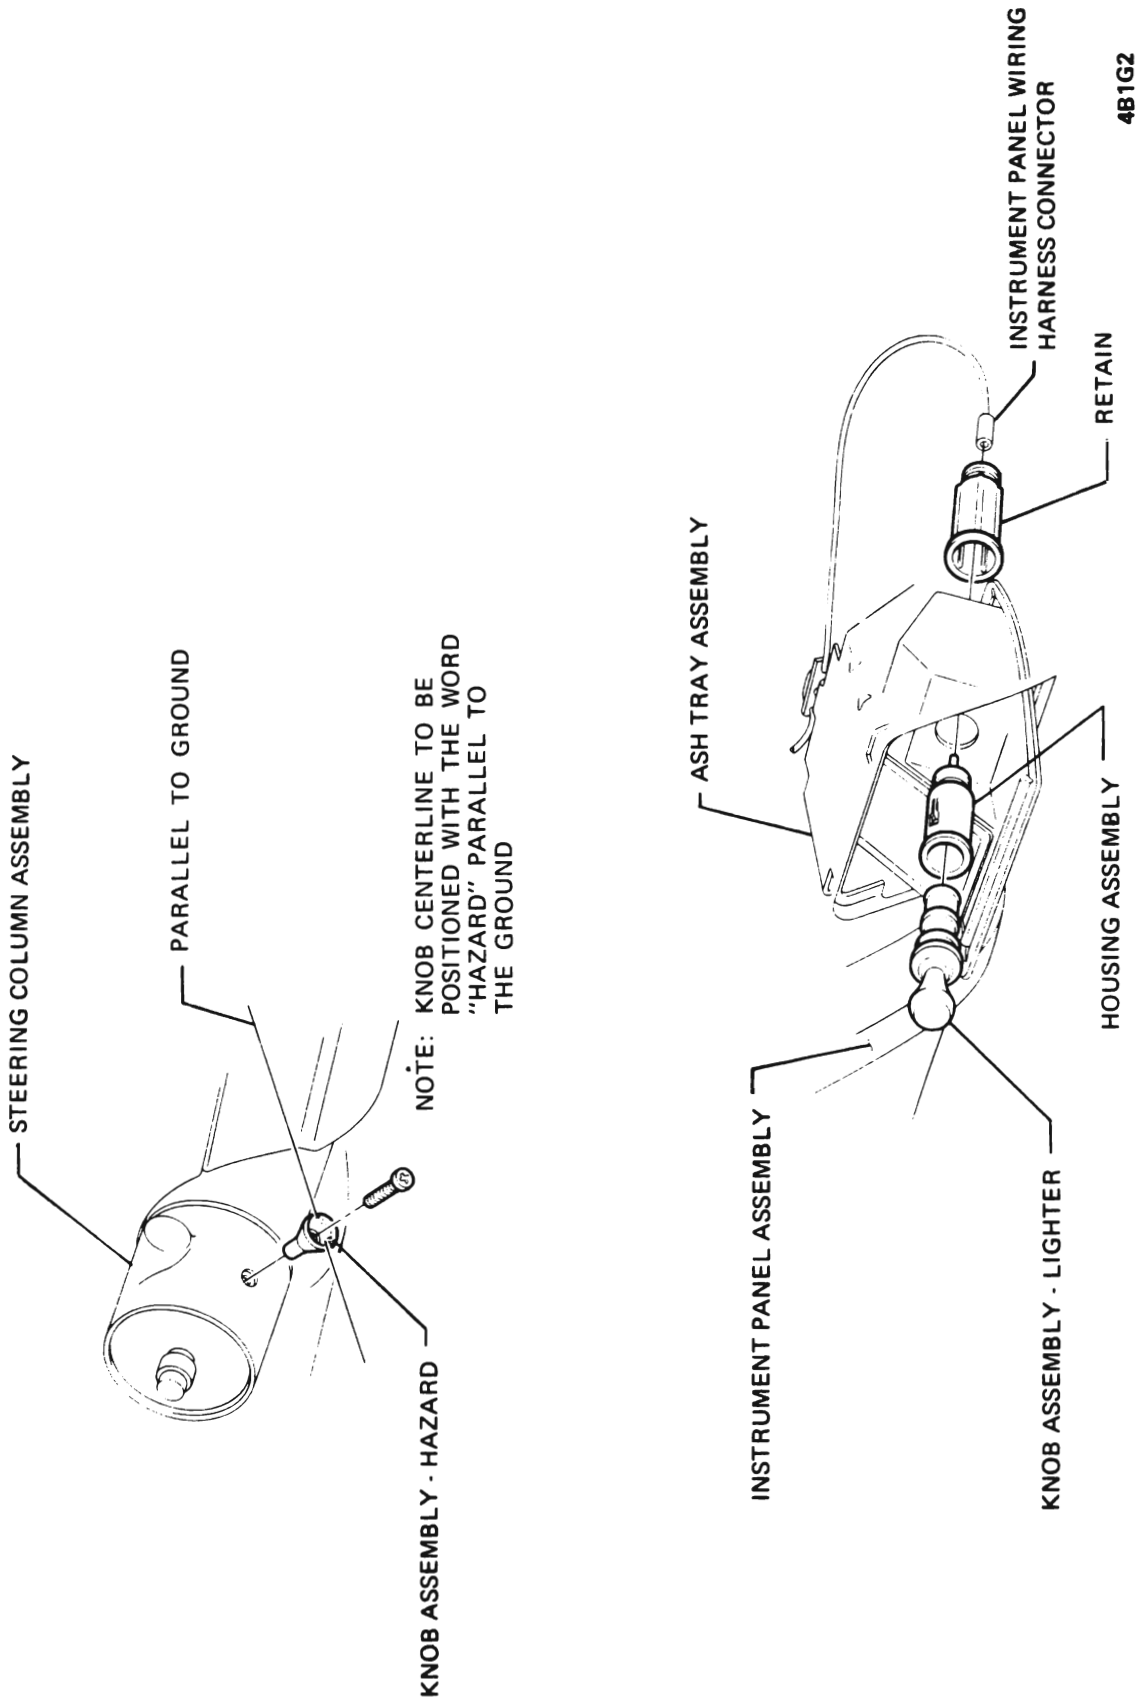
G-2 "X" Series Hazzard Flasher Knob and Cigar Lighter Removal
